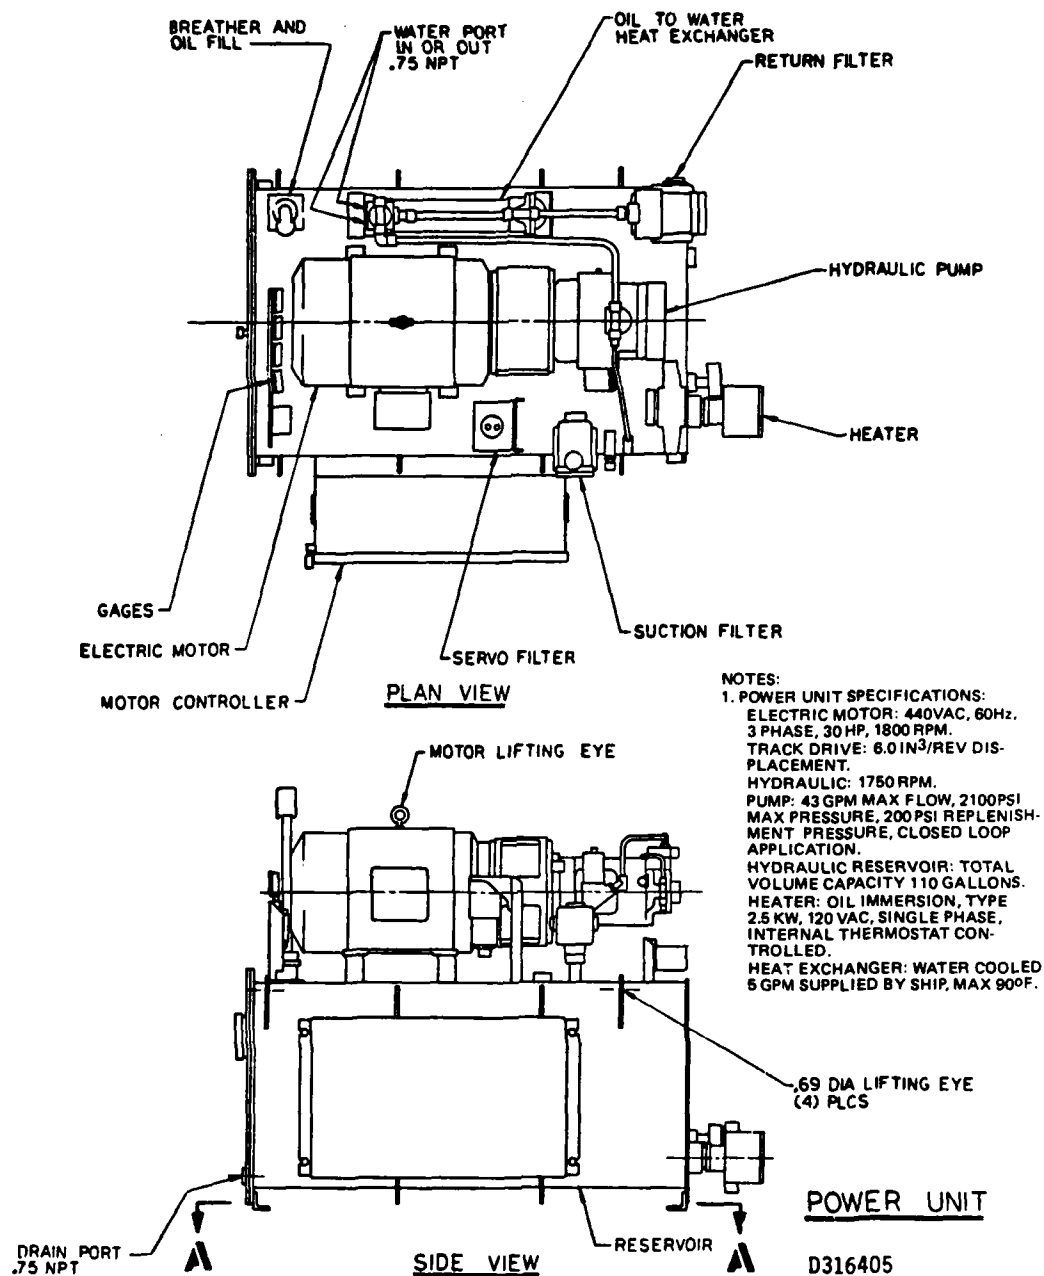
Outline and General Arrangement (Sheet 3 of 3)
